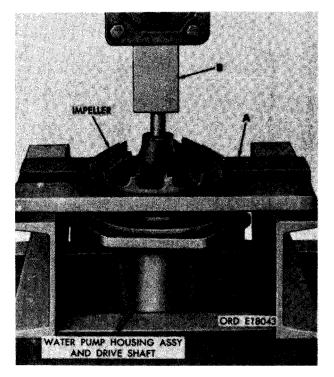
REMOVING WATER PUMP HOUSING AND DRIVE SHAFT FROM WATER PUMP IMPELLER.
